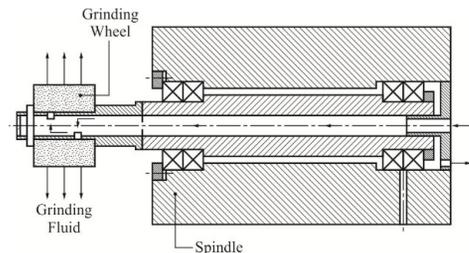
The example of the centrifugal grinding wheel supplying through the grinding spindle and through the grinding wheel [11]
